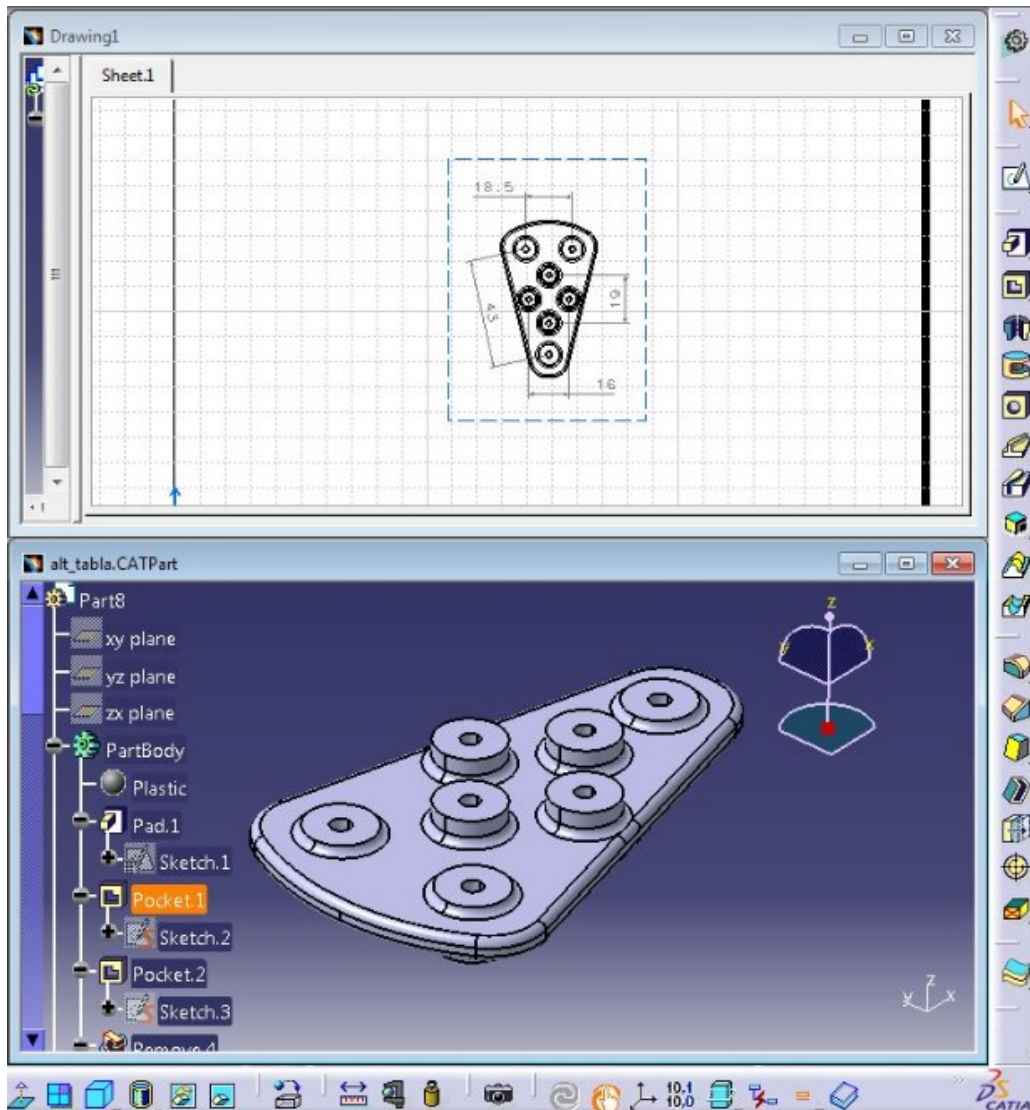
Part 2: Adaptor part to fit the actuator to the body frame is designed.
